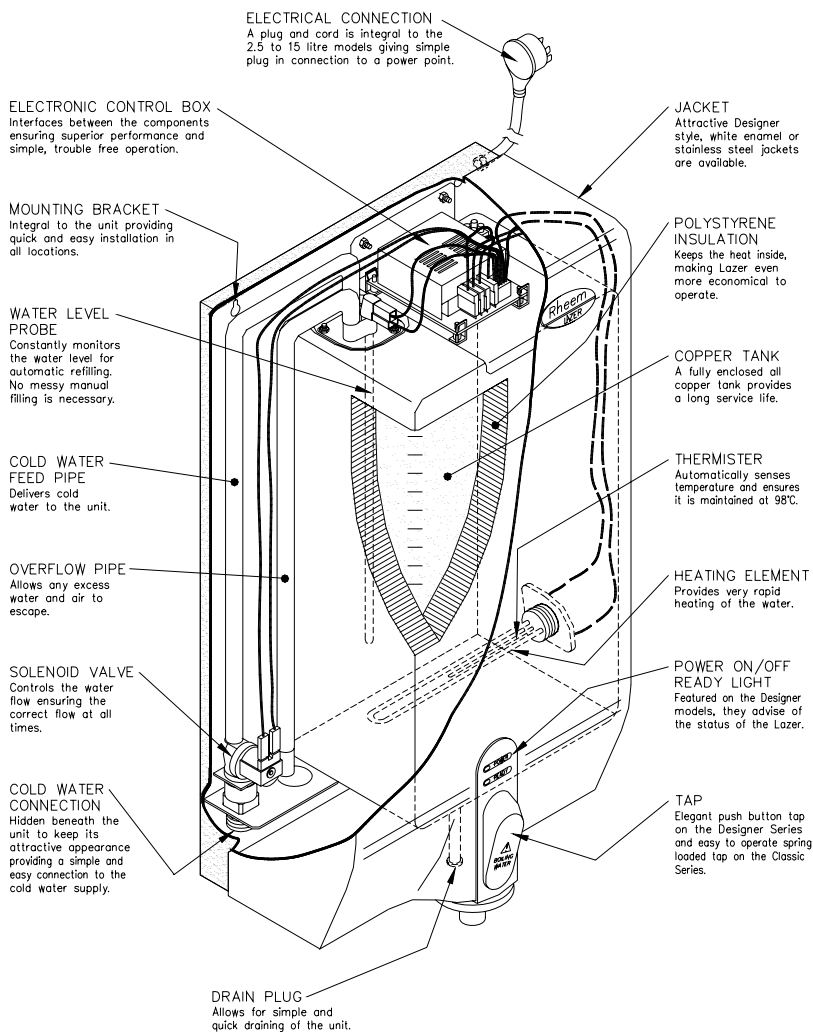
Cutaway view of a Designer series Rheem Lazer boiling water unit
